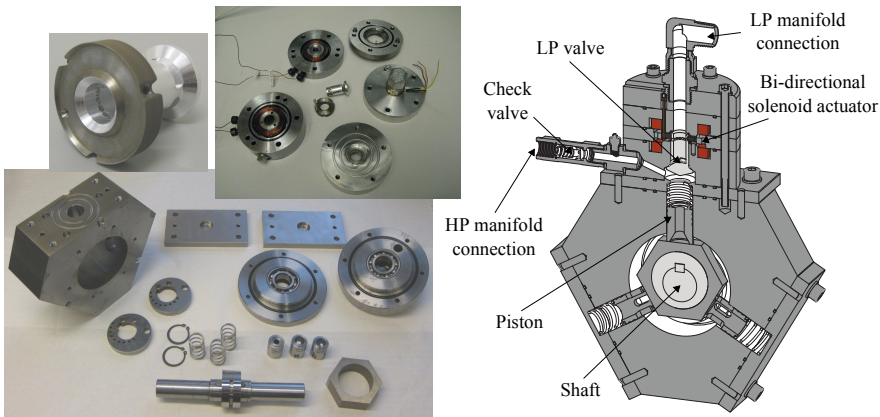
Prototype single piston DD pump designed and constructed in 2011 by Roemer and Johansen [25].
